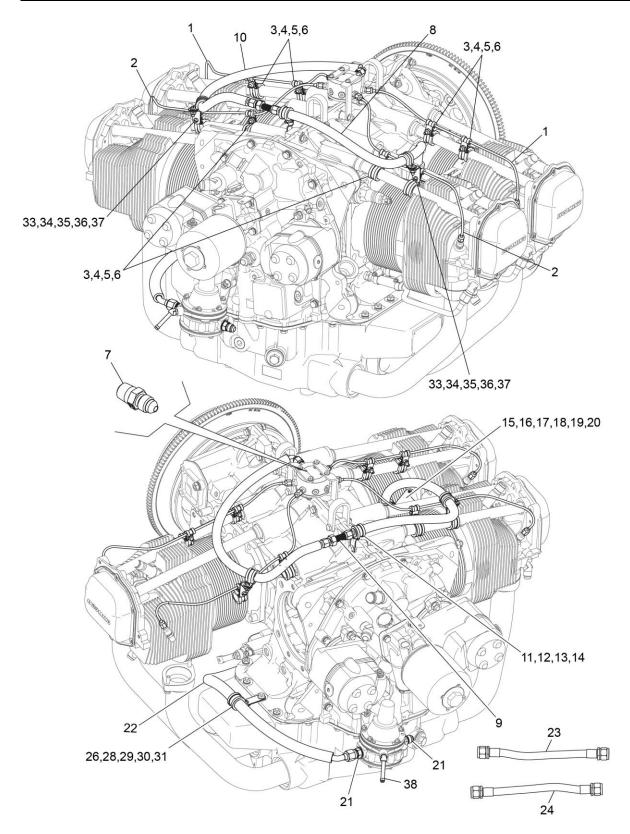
B Fuel Lines, Fuel Hoses, and Attaching Parts
